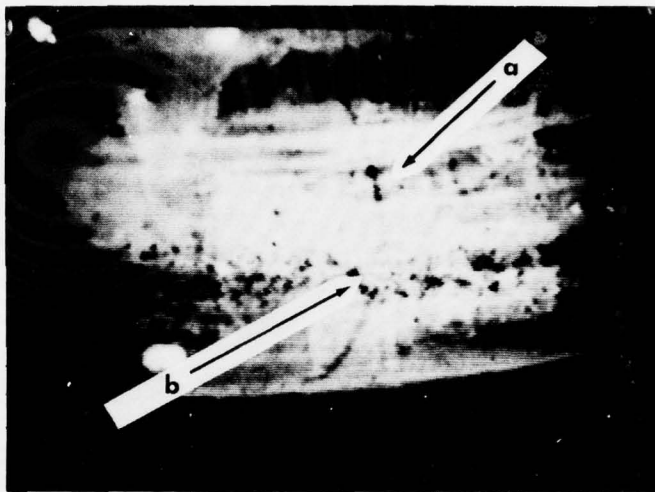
SEM micrograph (40X) of an inner race removed from an assembled bearing
